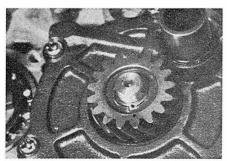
The marked tooth on the crankshaft gear must be aligned with marked spline as shown. Spline is not visible with nut installed.
